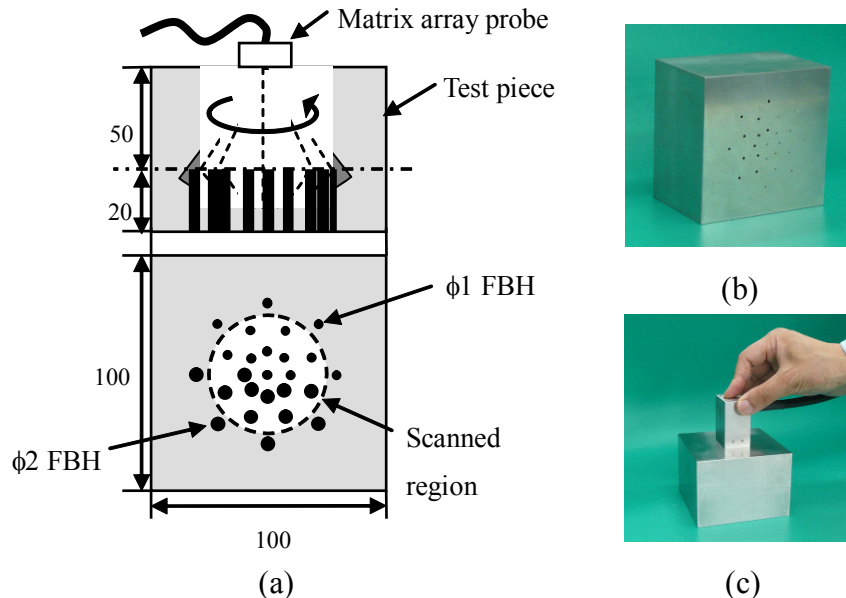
A stainless steel test piece with FBHs. (a) Dimensions of the test piece and the rotational sector scan described in the text. The scanned region is inside the broken line circle. (b) A photo of the bottom side of the test piece. (c) A photo of the test piece being scanned with a matrix array probe.
